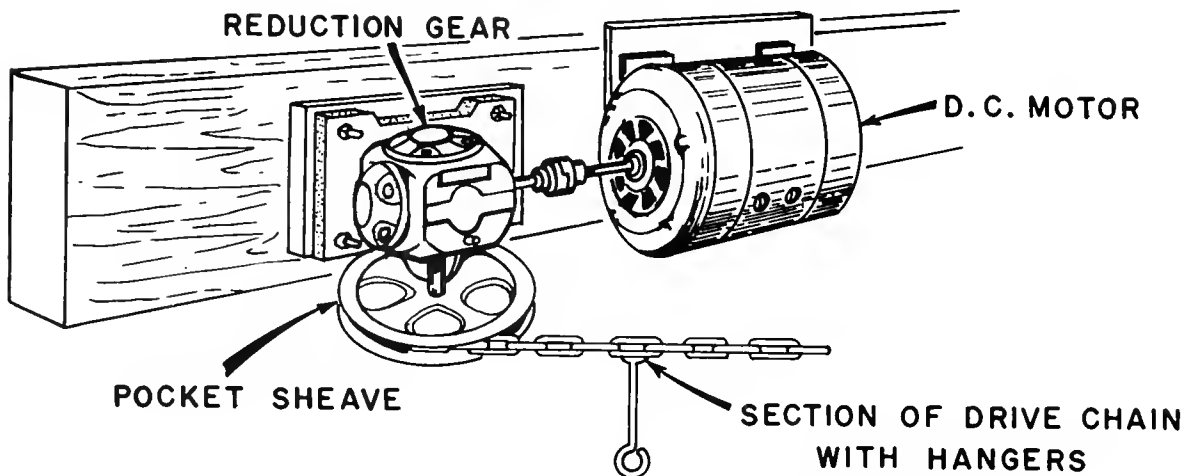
Variable-speed d.c. motor and reduction gear drive assembly on traveling screen.
